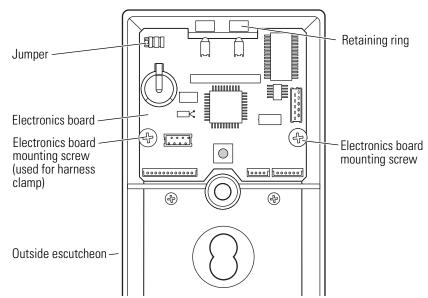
Removing and reinstalling the B.A.S.I.S. V proximity control electronics board
